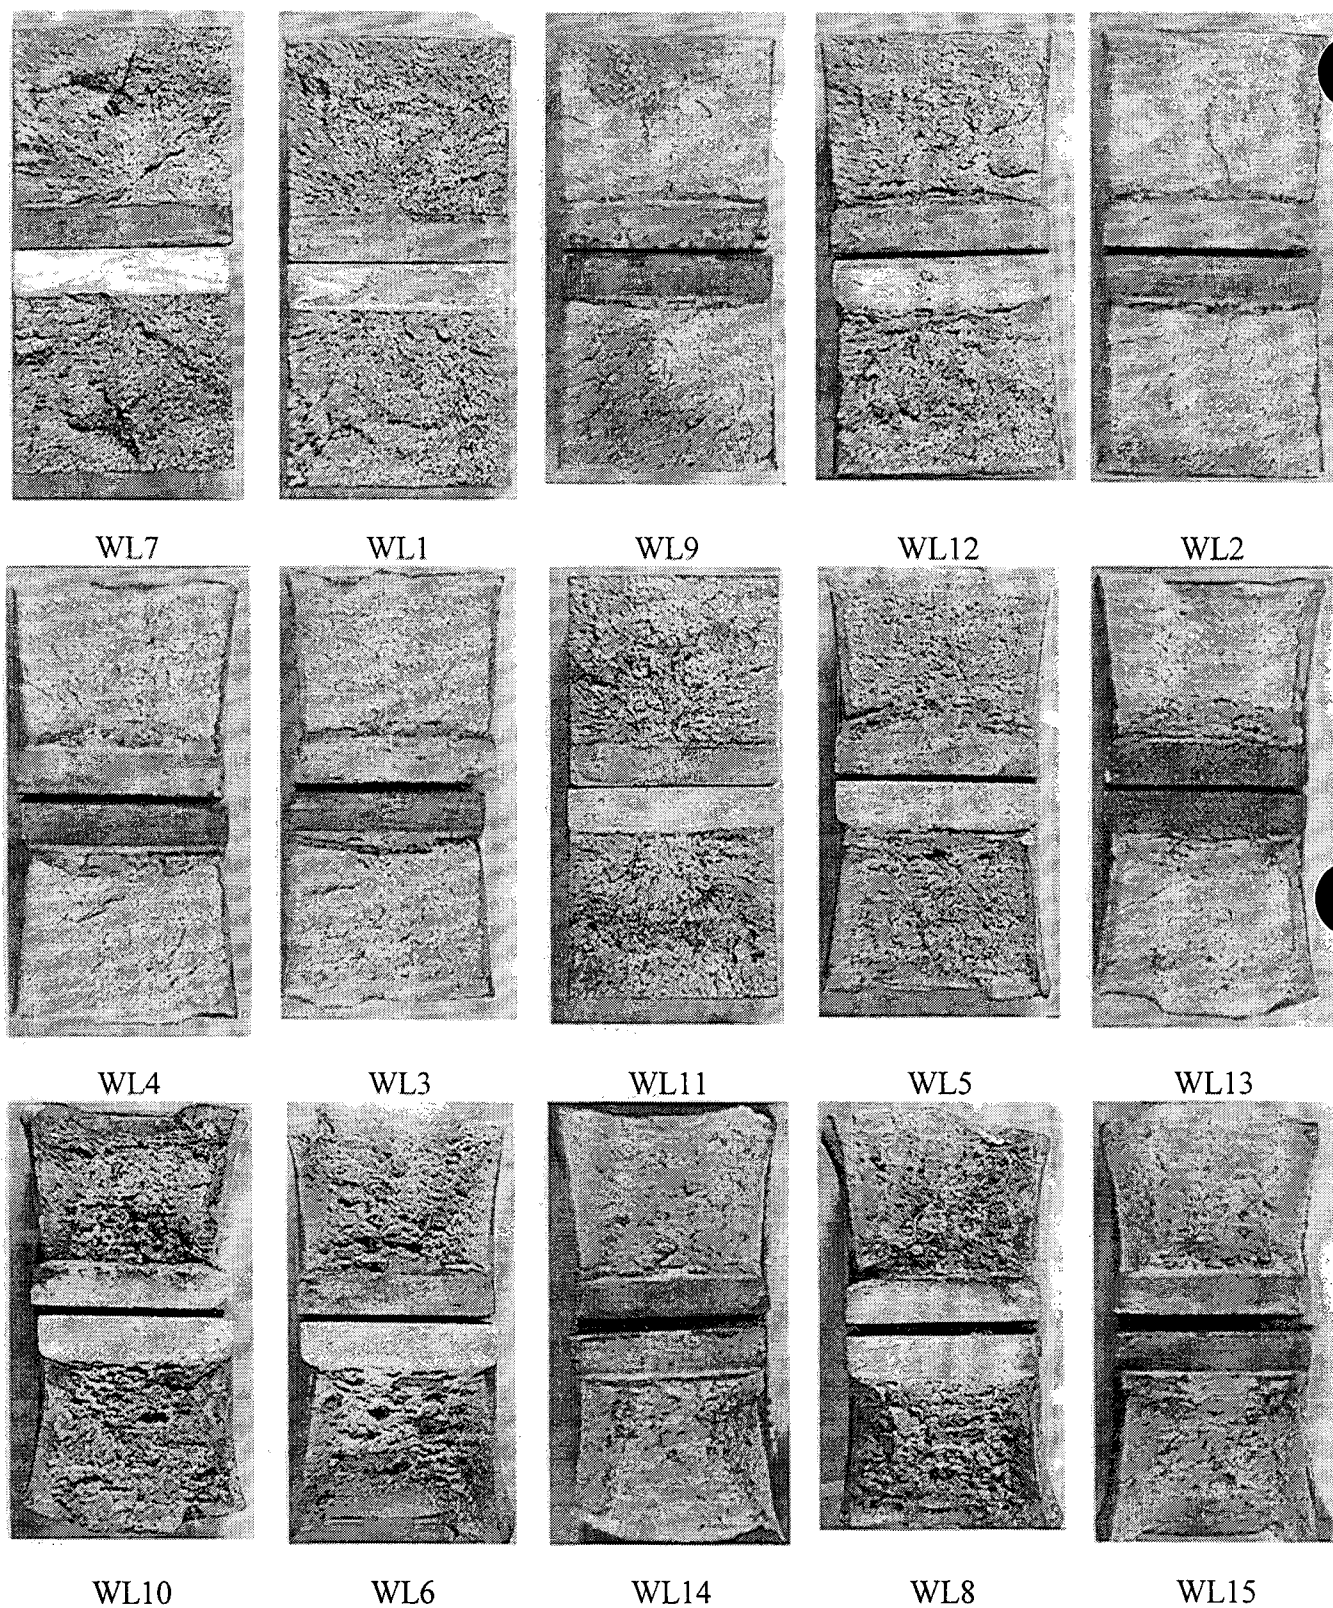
Charpy Impact Specimen Fracture Surfaces for Watts Bar Unit 1 Reactor Vessel Intermediate Shell Forging 05 (Tangential Orientation)
